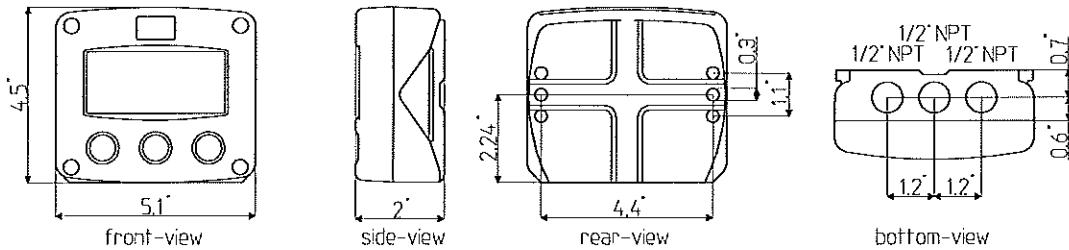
Dimensions of type HU - NEMA 4X Aluminum Field enclosure with 3x 1/2"NPT drilling.
